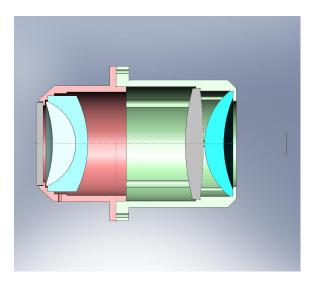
A lens housing assembly design based on the optical components imported from ZEMAX.
